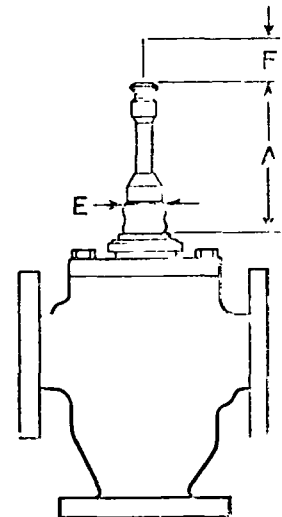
V5013B-E Flanged Body Dimensions in Inches (Millimeters) Refer to Table 4
